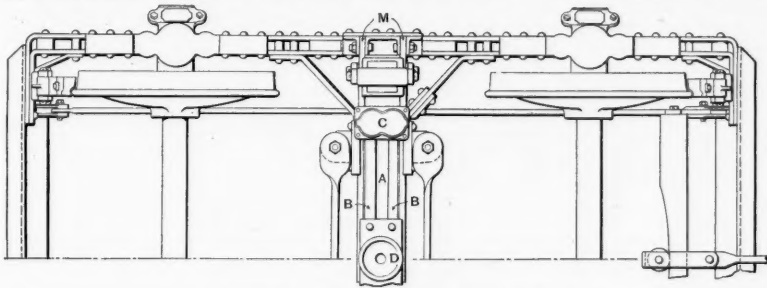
Half Plan View, Peckham's 14 A Truck.
